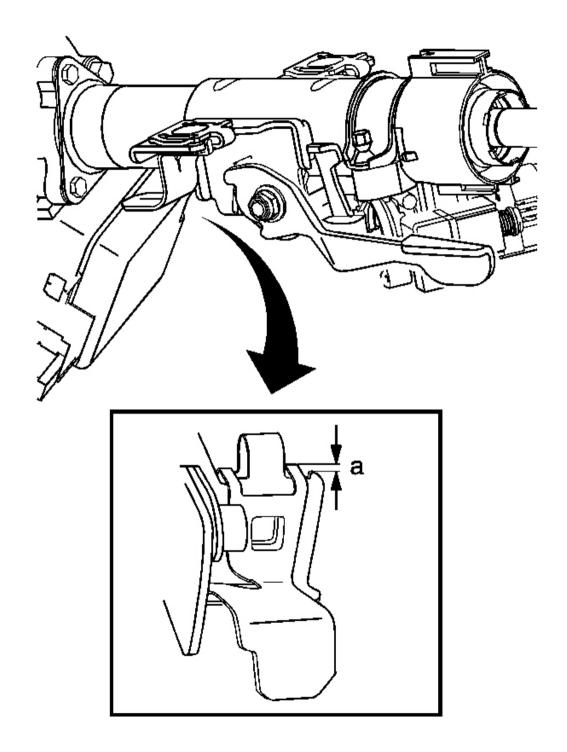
Inspecting The Upper Steering Column Mounting Capsule Nuts For Movement Courtesy of GENERAL MOTORS CORP.
